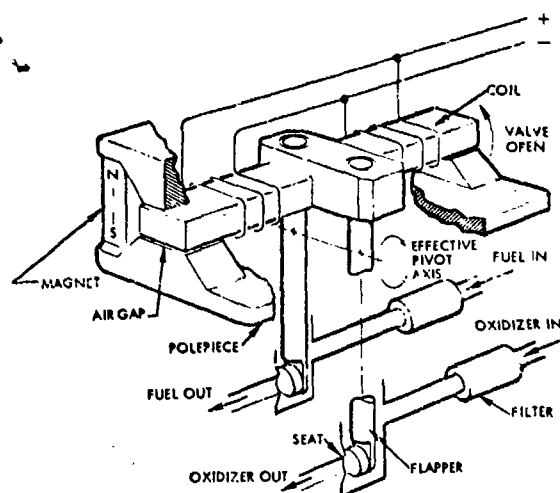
Torque Motor Actuated Bipropellant Valve Schematic
